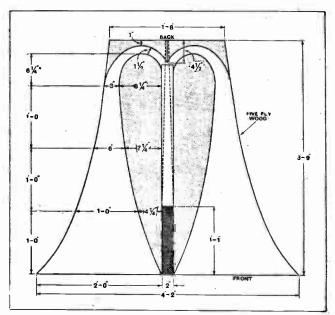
Plan of layout of baseboard and central section of 12 foot exponential horn having cut-off frequency of 64 cycles. The mouth is 4 feet square.
